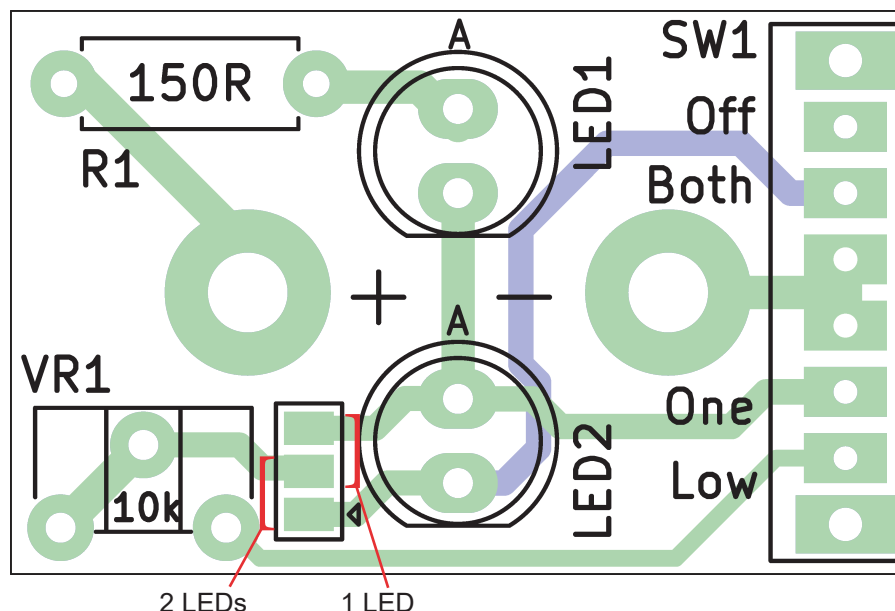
The torch PCB showing the solder pads to bridge for one or two LEDs in moonlight mode. Note that green is the front copper layer while blue is the rear copper layer.
